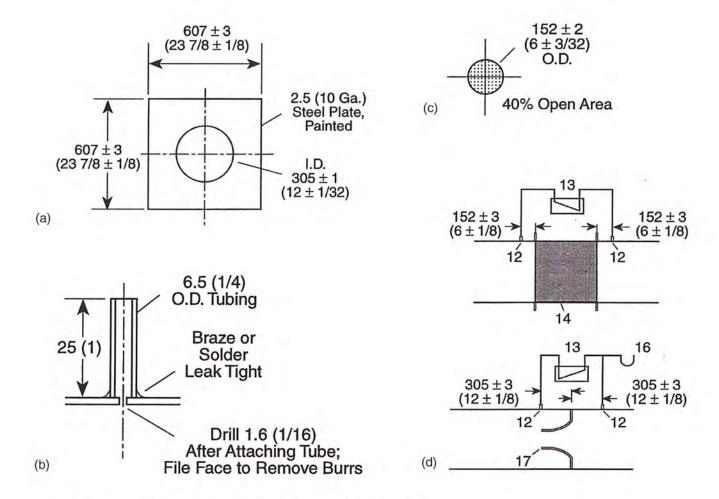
Details of test duct components. Dimensions are in mm (in.).
